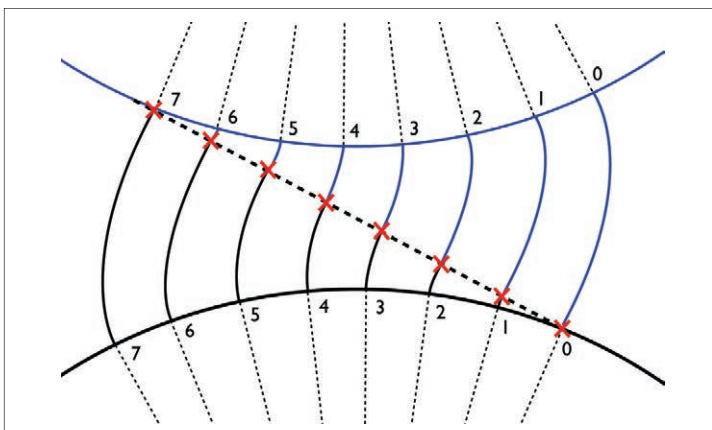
Using the markings in Figure 10, an involute shape is built incrementally.
